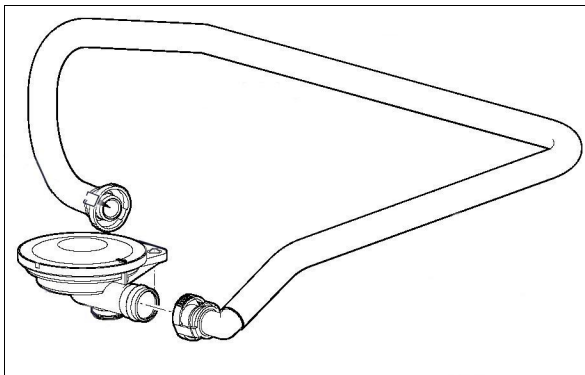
Positive crankcase ventilation valve (PCV) part throttle
